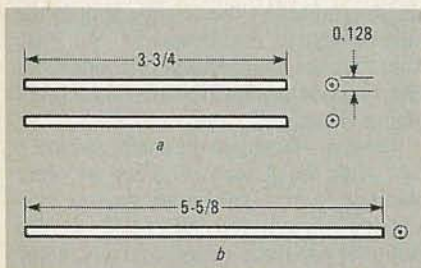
SHAFT DIMENSIONS. Two sets of three shafts are required.
